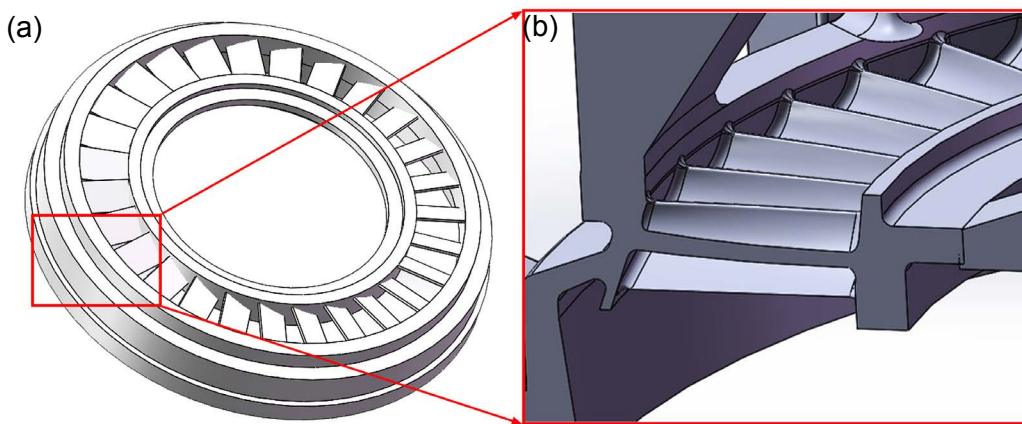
Three-dimensional model of turbine nozzle casting (a) and cross-section of vanes (b)
